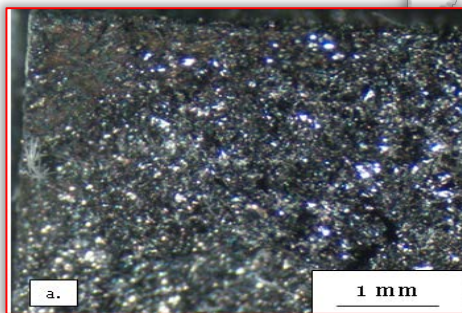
Fracture surface and corrosion of cylinder head in the combustion chamber after tensile testing
